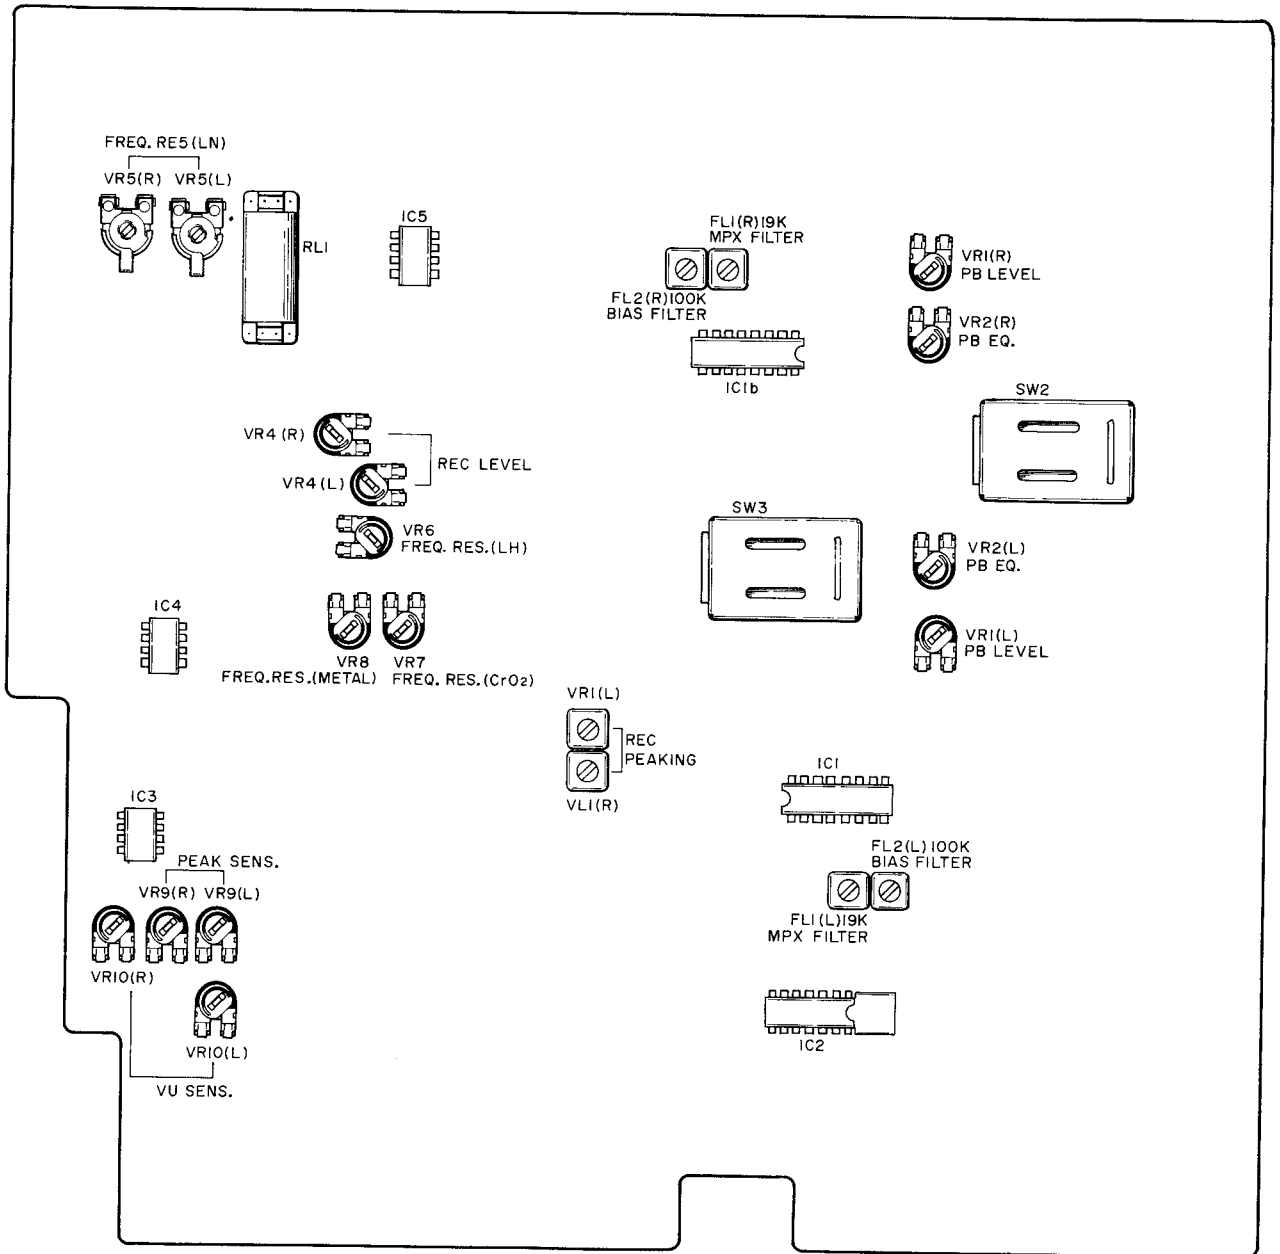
Adjustment Points Pre Amp P.C Board CL-5001A
